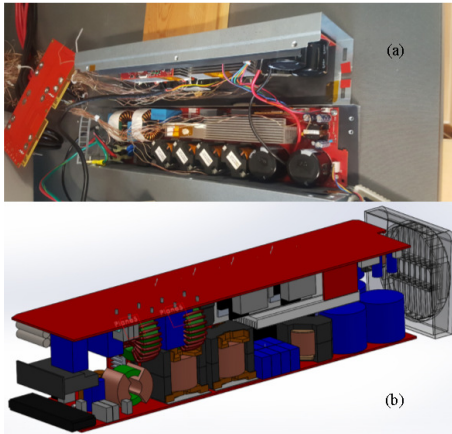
(a) Unbolted module under study. (b) CAD model of the module without chassis to highlight internal details
